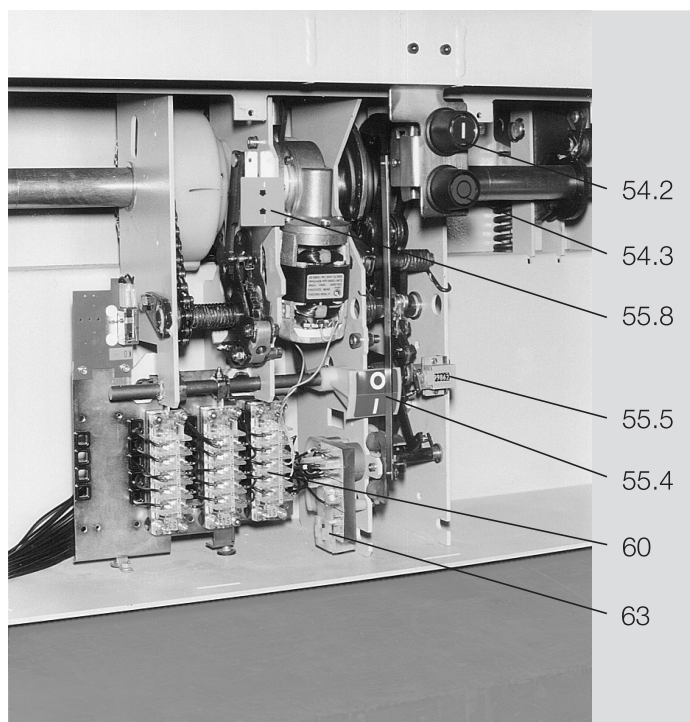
/1: Vacuum circuit-breaker, type VD4, for fixed installation, stored-energy spring mechanism, front panel removed
